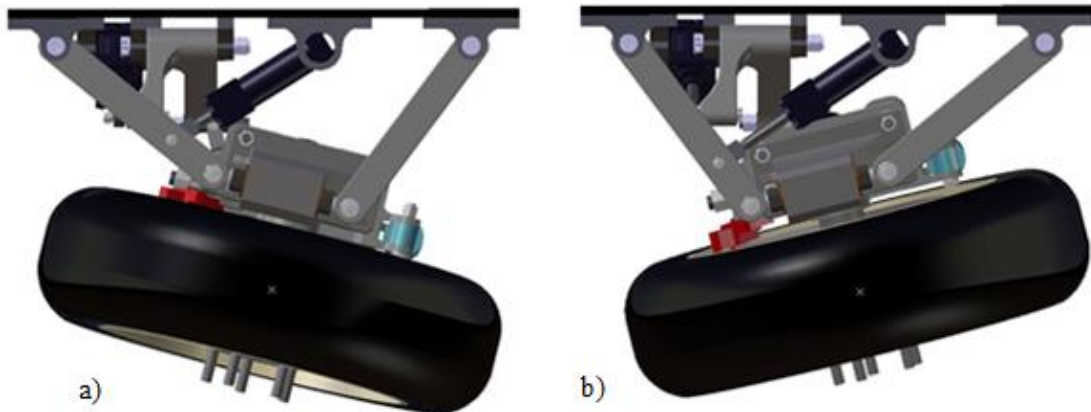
a) bottom view of the corner module with 15 degrees of steering angle. b) Bottom view of the corner module with -15 degrees of steering angle. It can be seen the contact patch of the wheel has negligible travel due to steering.
